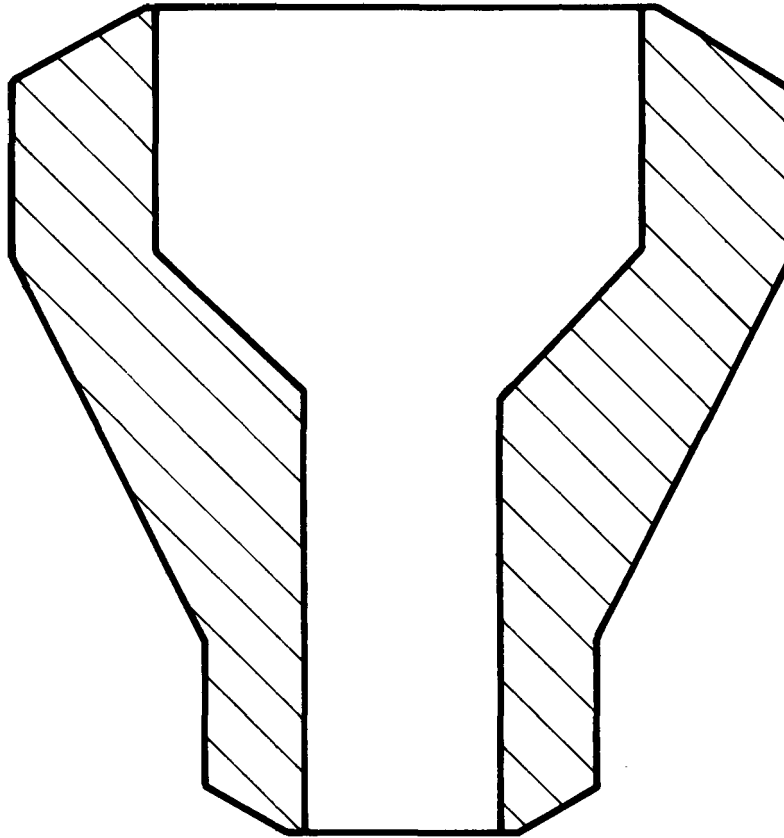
CROSS SECTION OF A TYPICAL MACHINED
